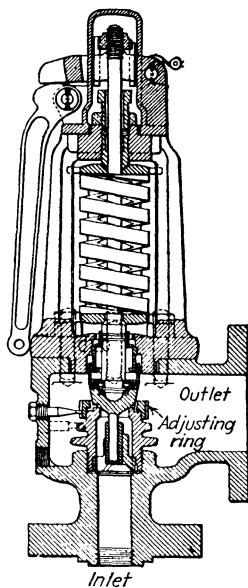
Economizer relief valve. (*Consolidated Ashcraft Hancock.*)
